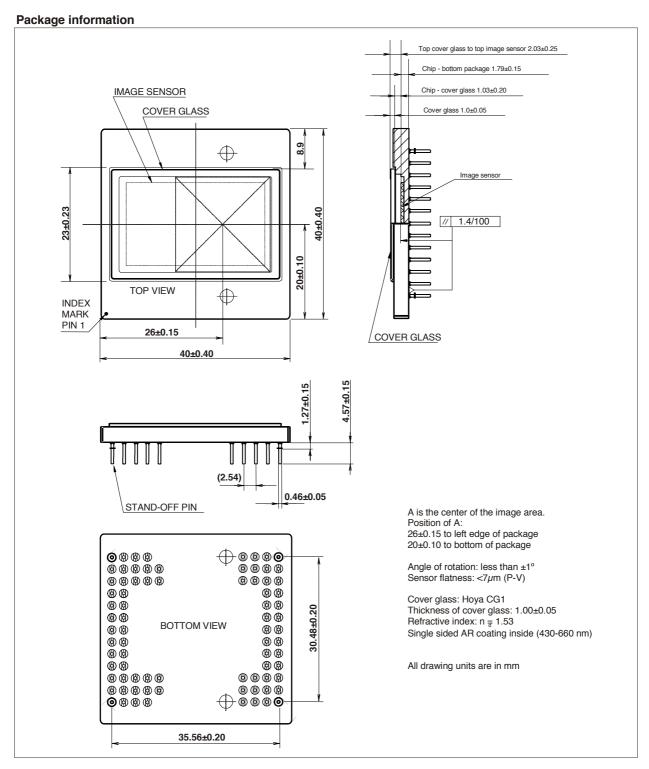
Mechanical drawing of the PGA package of the FTT1010M
